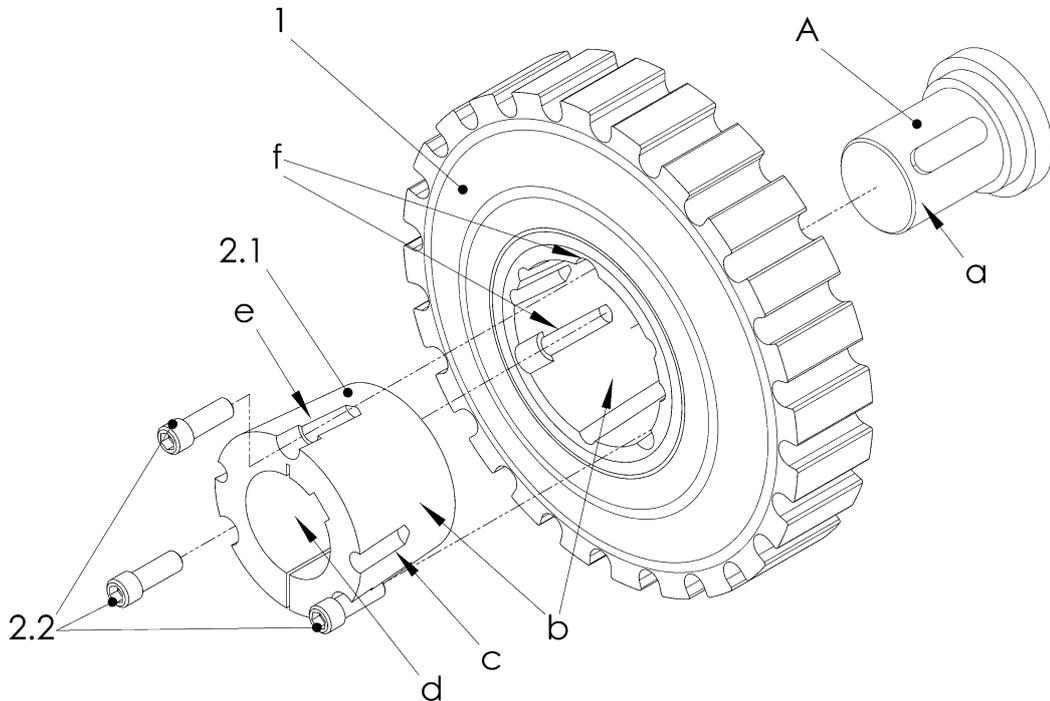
004G-01800...04600: Preparing the rubber element and the taper bush
